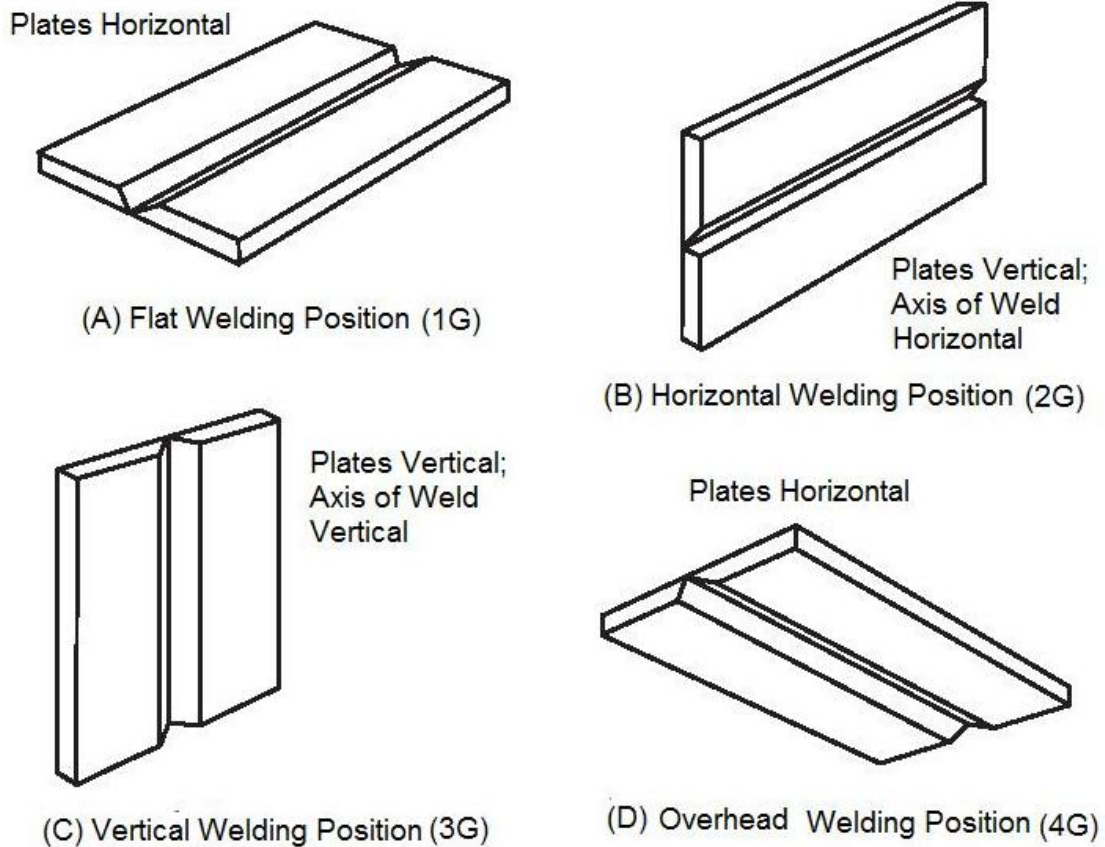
Different welding positions for the Single-V-Groove welding process
